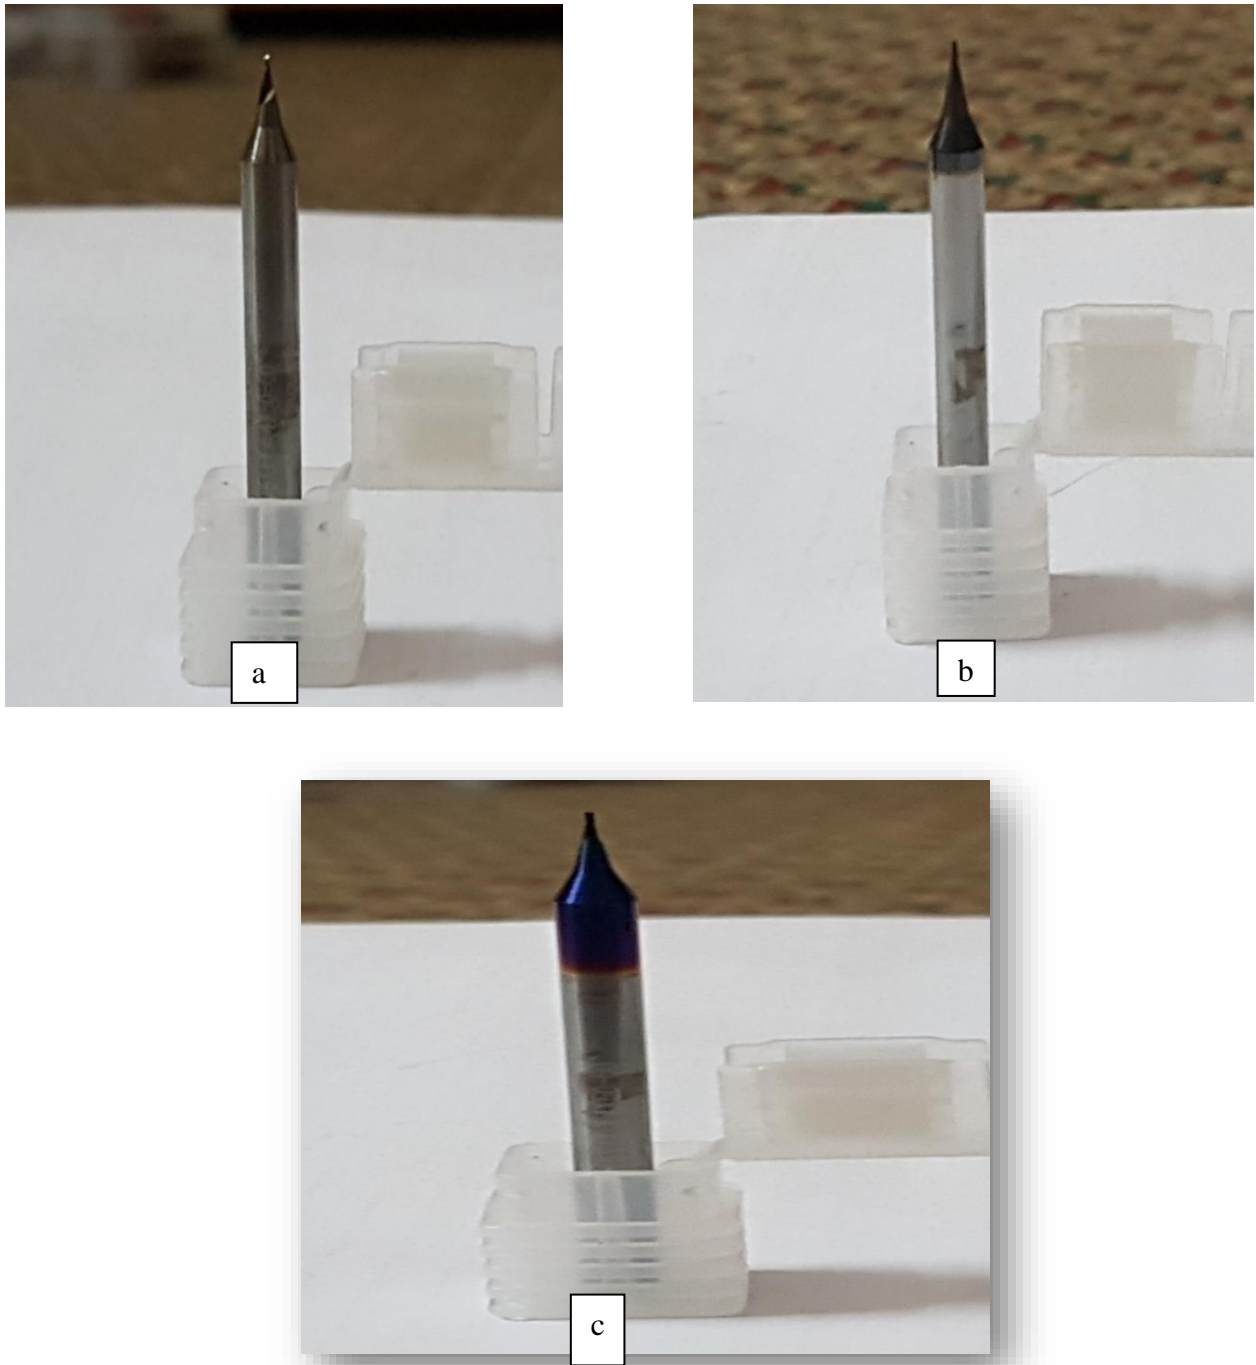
(a) Uncoated Carbide Tool (b) AlTiN Coated (c) nACO Coated
